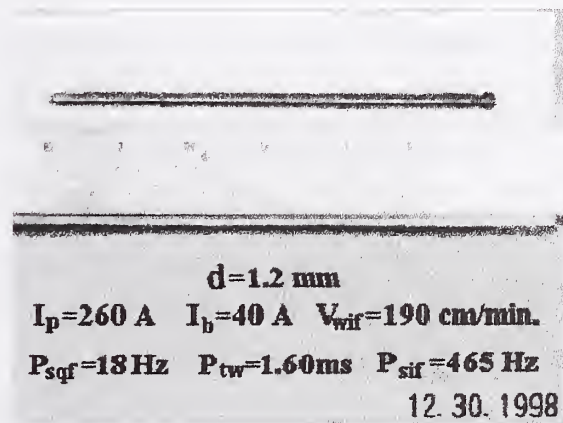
Photos of Weld Bead with Detachment Frequency of 18 Hz
